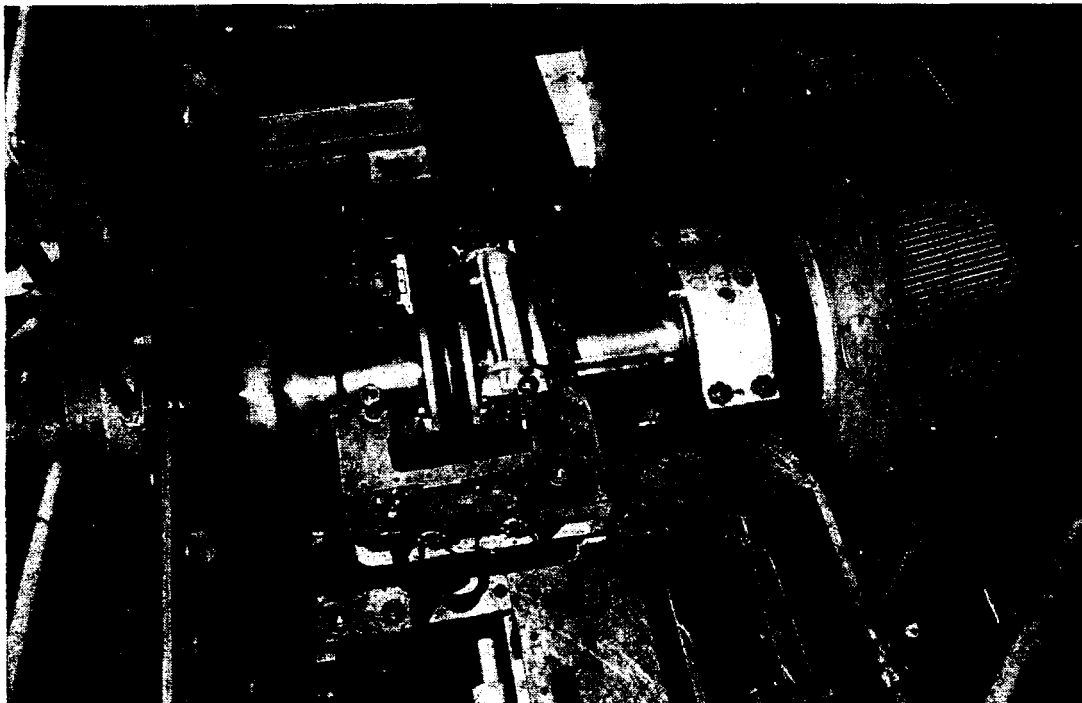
Y.E.A.D.1—GEARCASE WITH TOP HALF REMOVED
